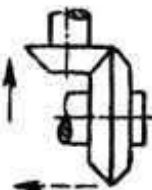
Control modes of meshing of bevel pinions of main gear by contact spot
